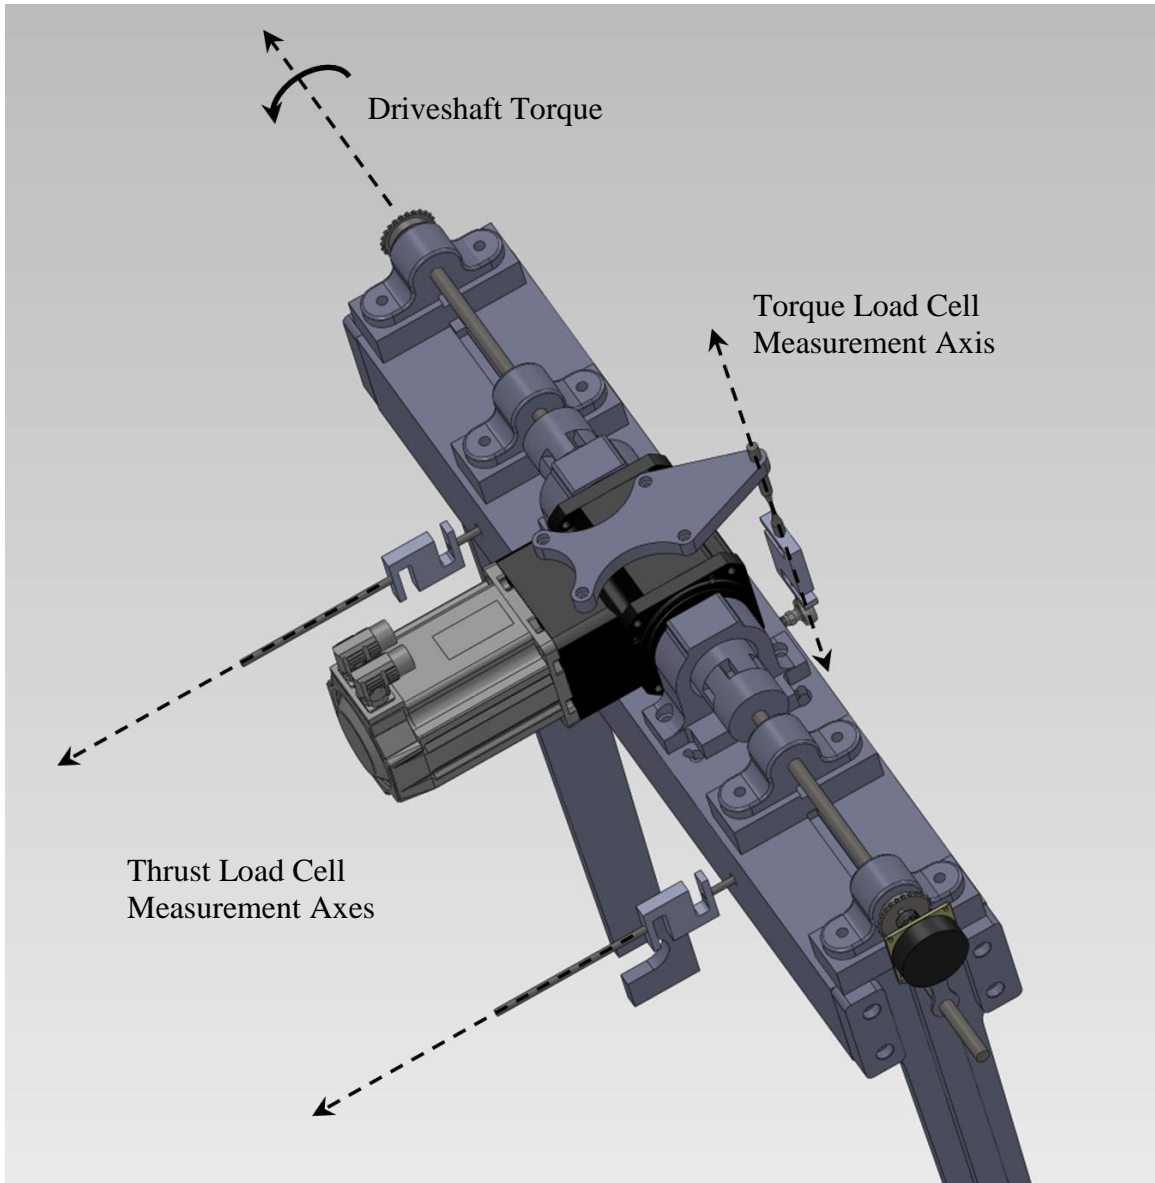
A solid model of the upper assembly of the cross-flow turbine is shown with measurement axes. The torque in the driveshaft is measured with a load cell mounted perpendicular to the motor, at a certain distance from the driveshaft. Torque is calculated using the force in the load cell and this distance. The rotor torque is transferred to the driveshaft with a chain-drive (not shown). The thrust load cells measure the force parallel to the direction of turbine motion.
